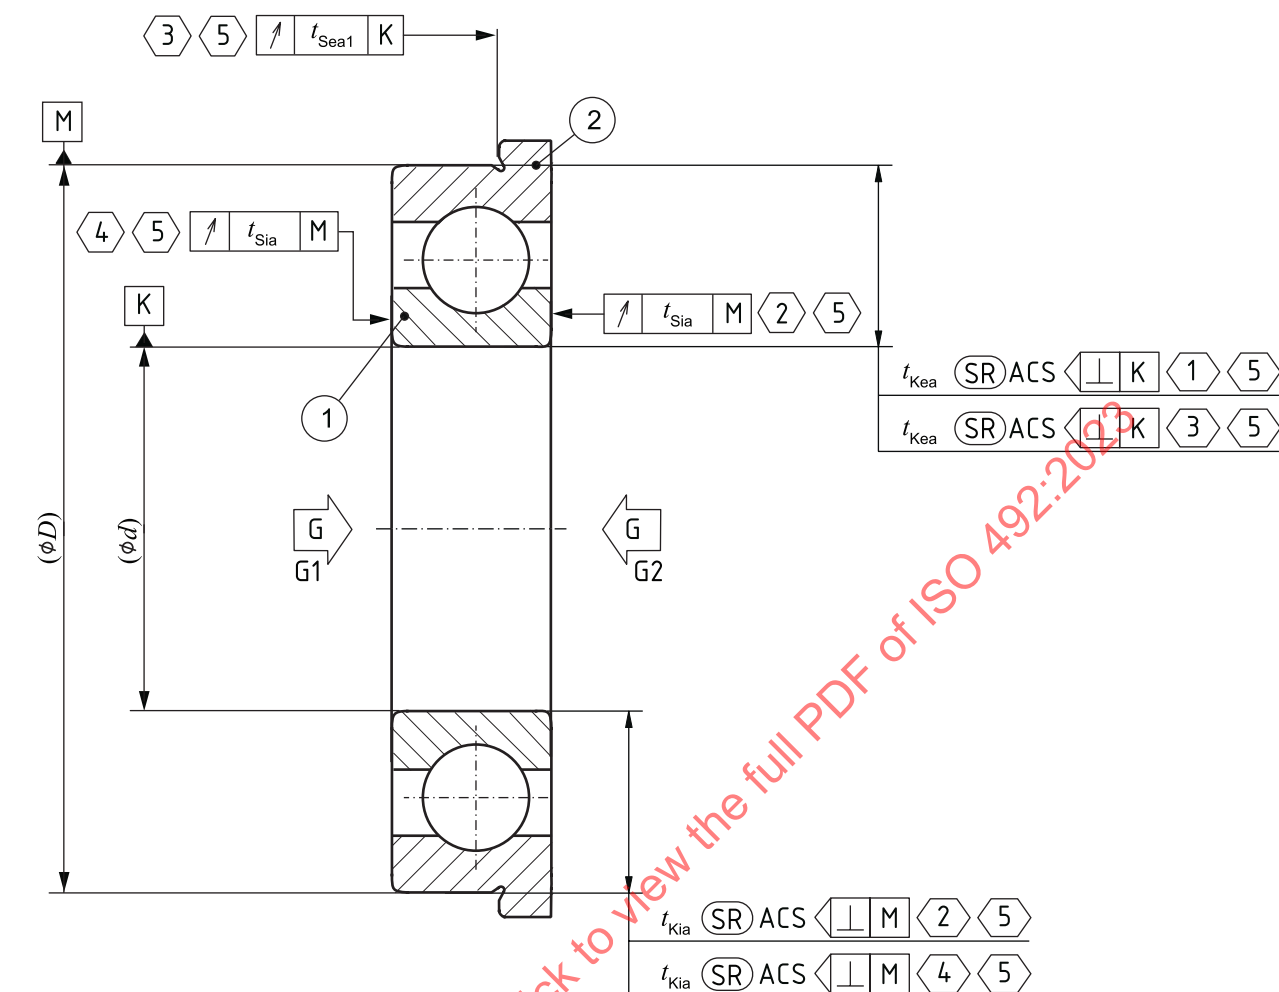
Geometrical tolerances for single components of bearing with flanged outer ring
